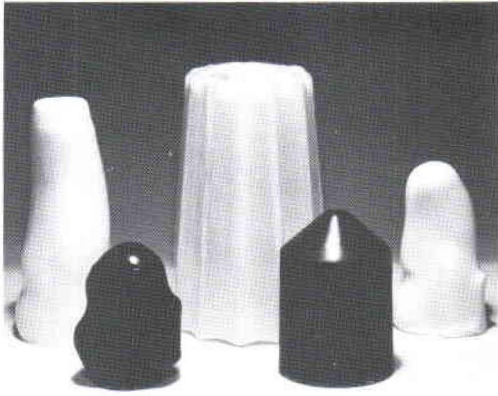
Crosslinked HDPE preforms and shrink formed sockets
